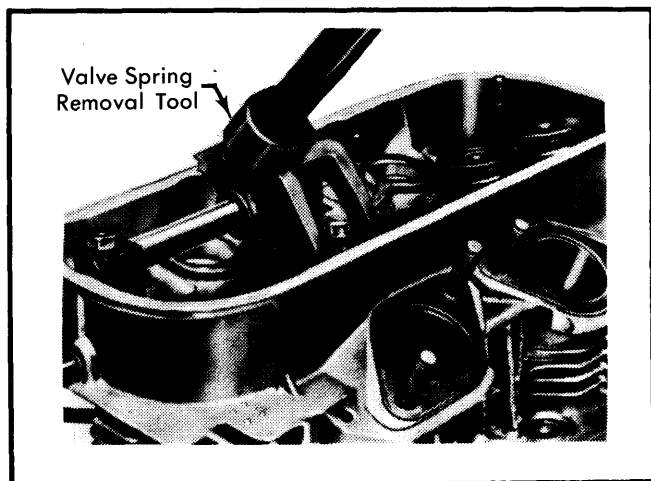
Using Special Tool VW311s to Remove Valve Spring
